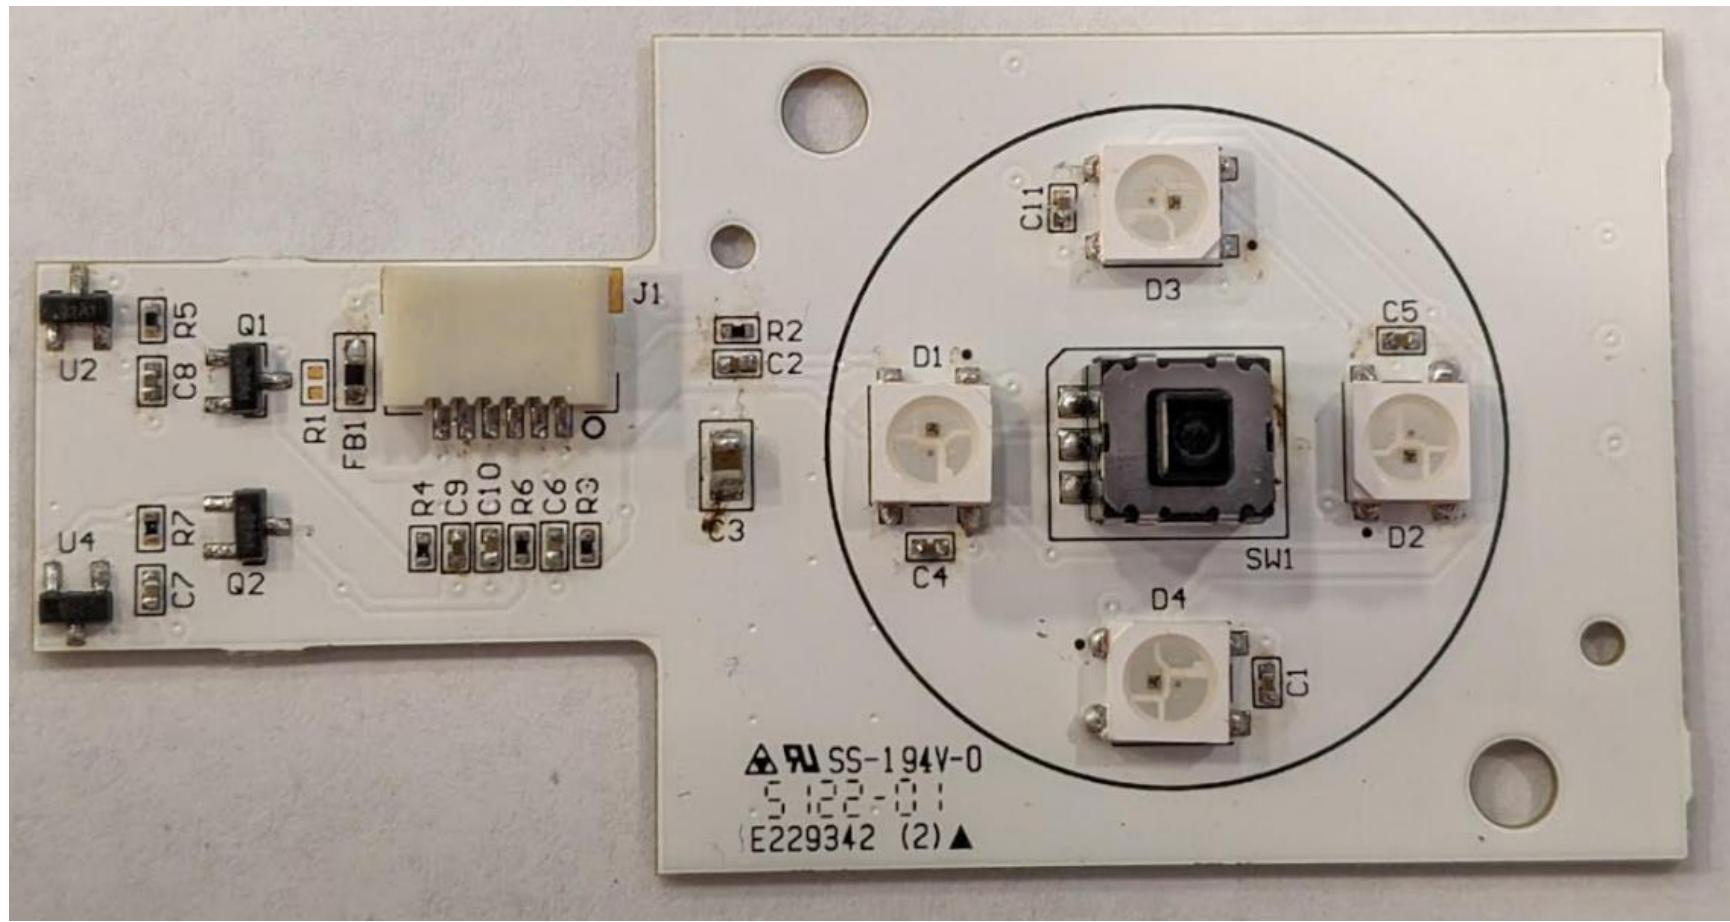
GF-PCA-00154-Lid PCBA- Top Side
